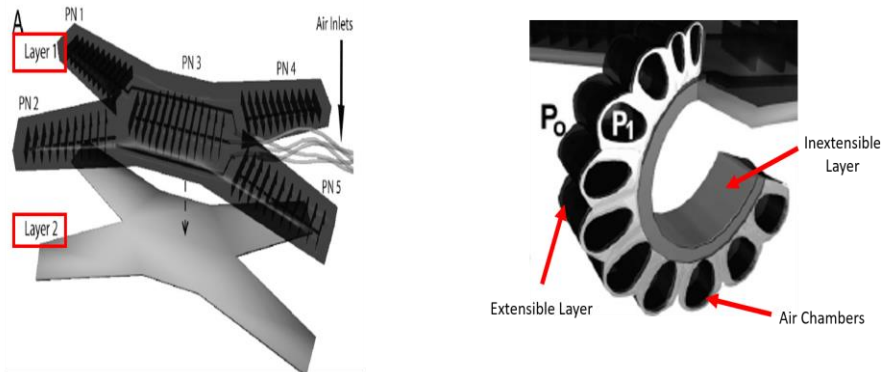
Multigait Robot (a) assembly and (b) tentacle detail view (reproduced as is from [33]).
